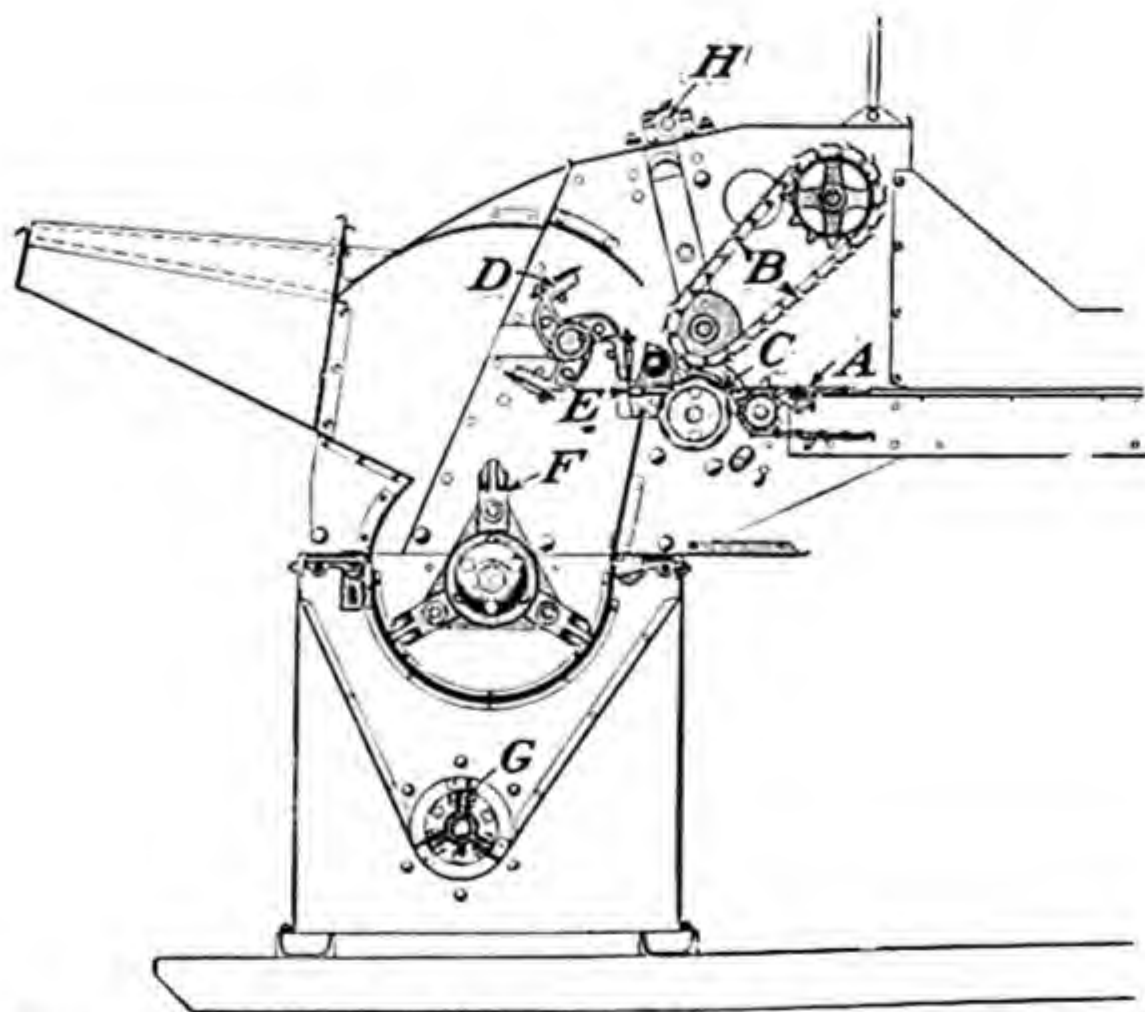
Cross-sectional view of combination roughage cutter and hammer mill: *A*, feed-table conveyor chain; *B*, compressor web; *C*, feed roll; *D*, cutterhead; *E*, shear bar; *F*, hammers on rotor; *G*, blower fan; *H*, governor shaft.
